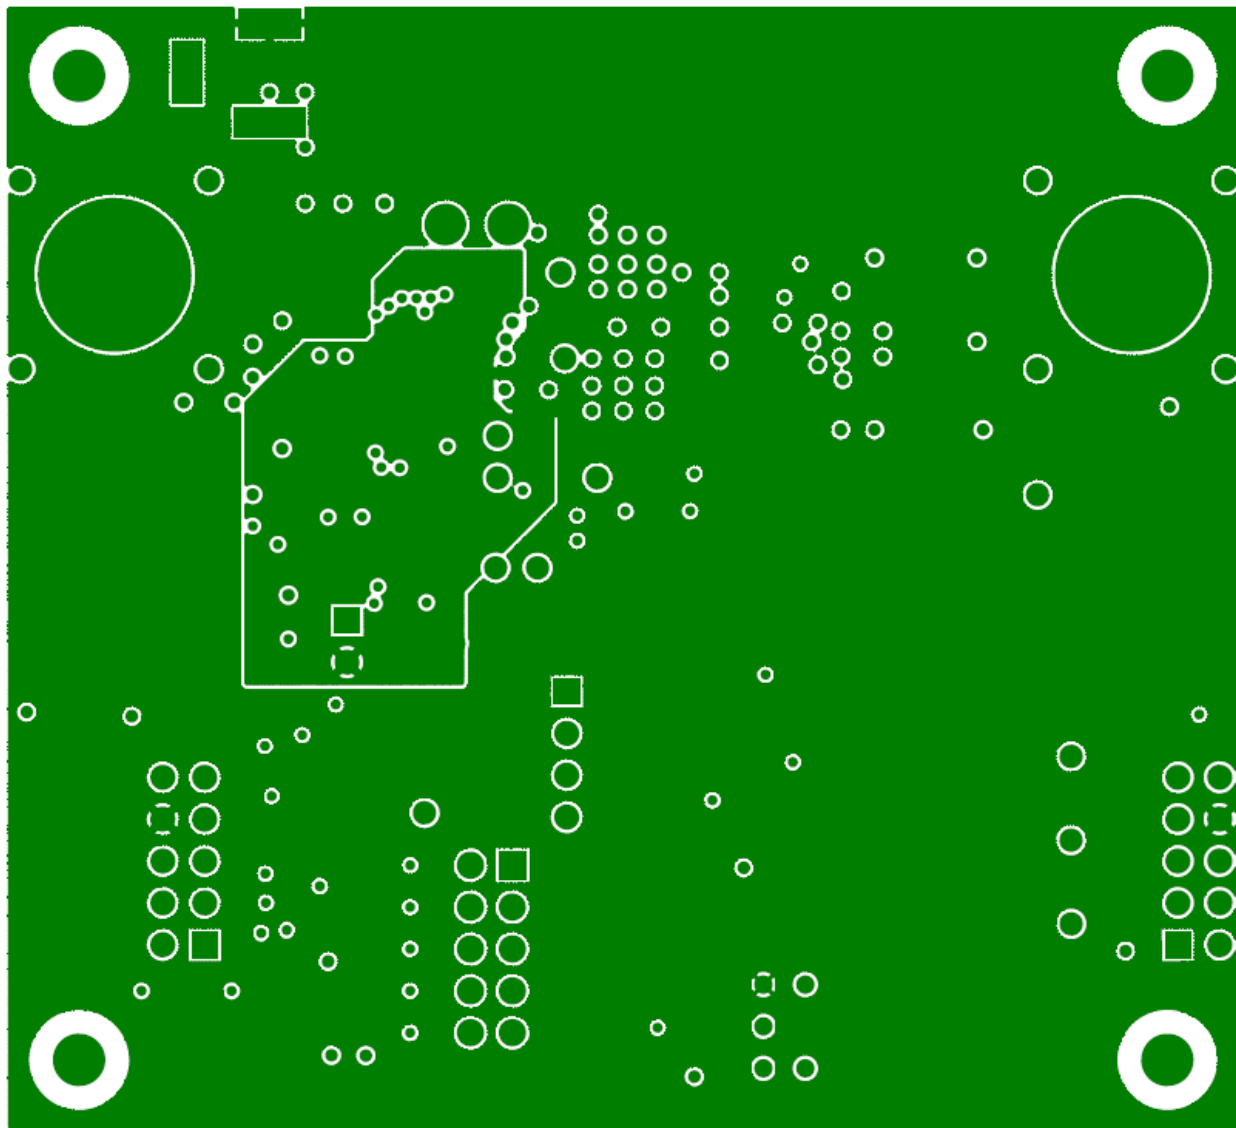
PCB – Inner Layer 1 (Viewed from Top)
